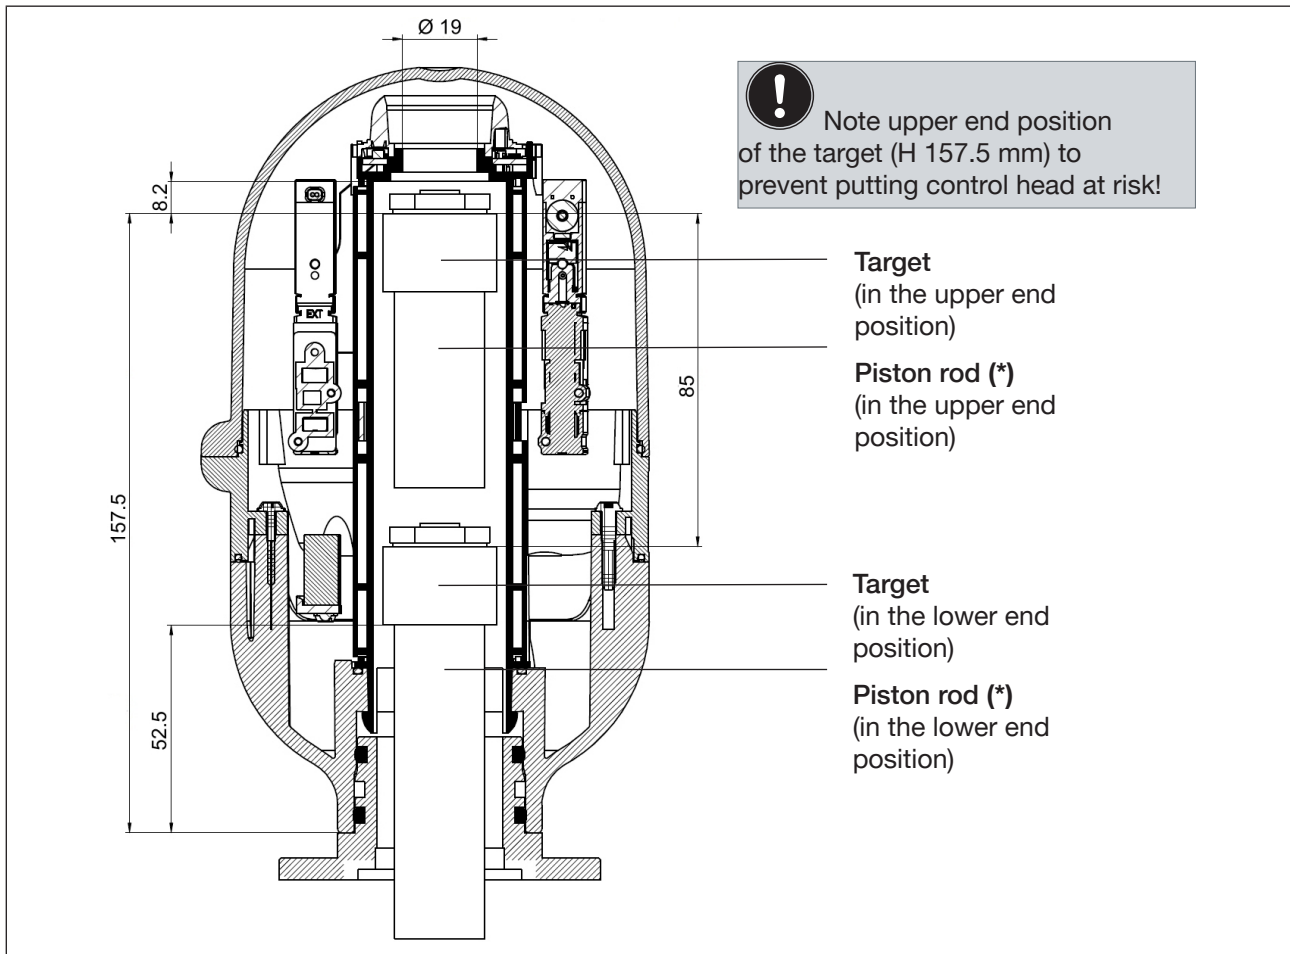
Sectional view of the control head and piston rod with target (in upper and lower end position)
